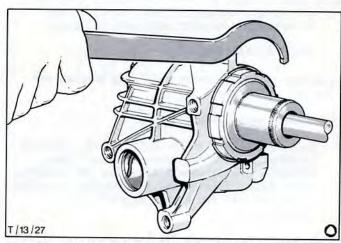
Remove thrust bearing adjuster, using service tool 13 002.
